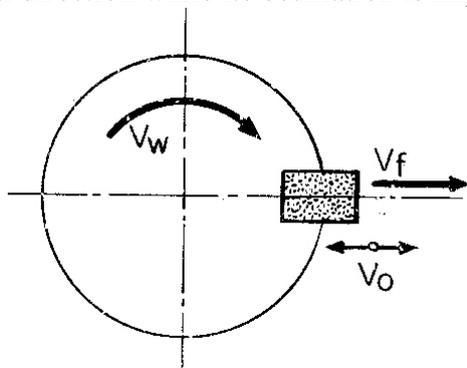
superfinishing of end face of a cylindrical work piece in radial mode
